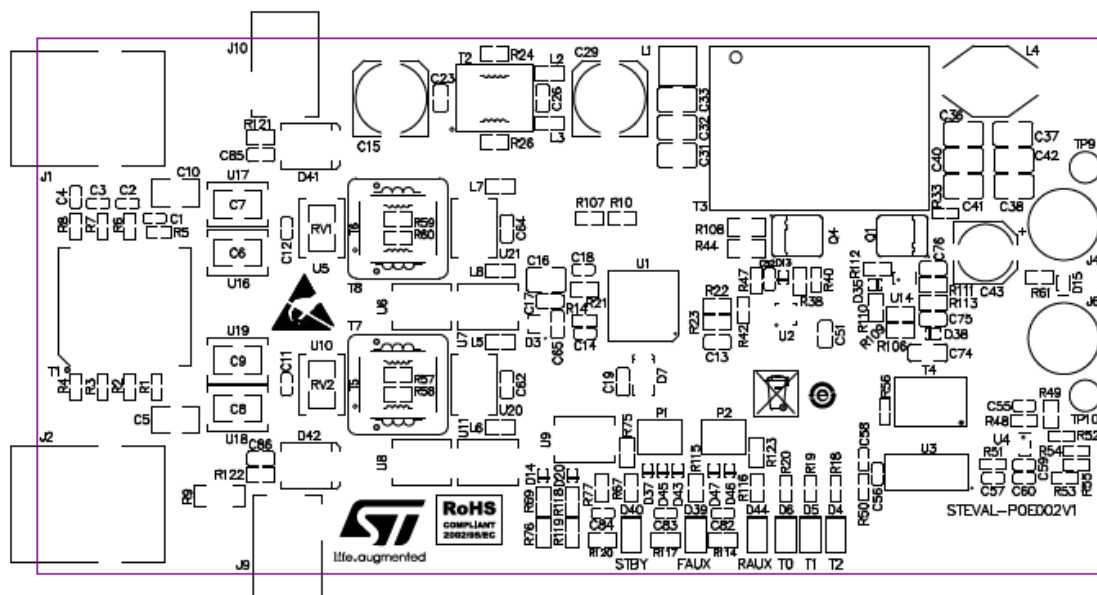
STEVAL-POE002V1 evaluation board: PCB bottom assembly
